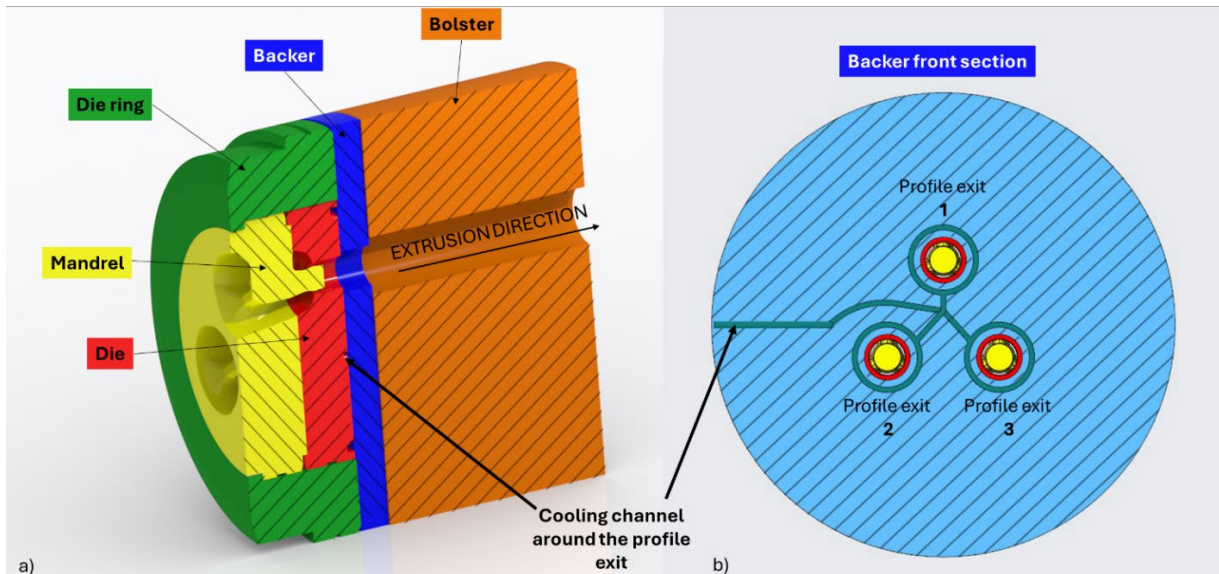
a) Extrusion die assembly; b) Backer front view with cooling channel design.
